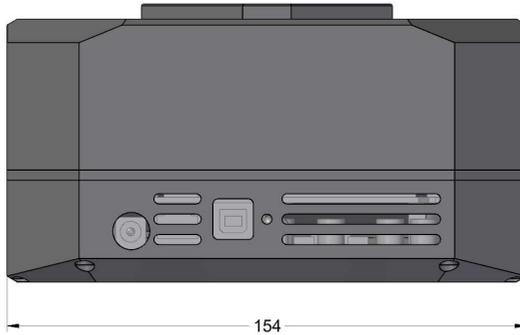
G3 camera head with External filter wheel bottom view dimensions
